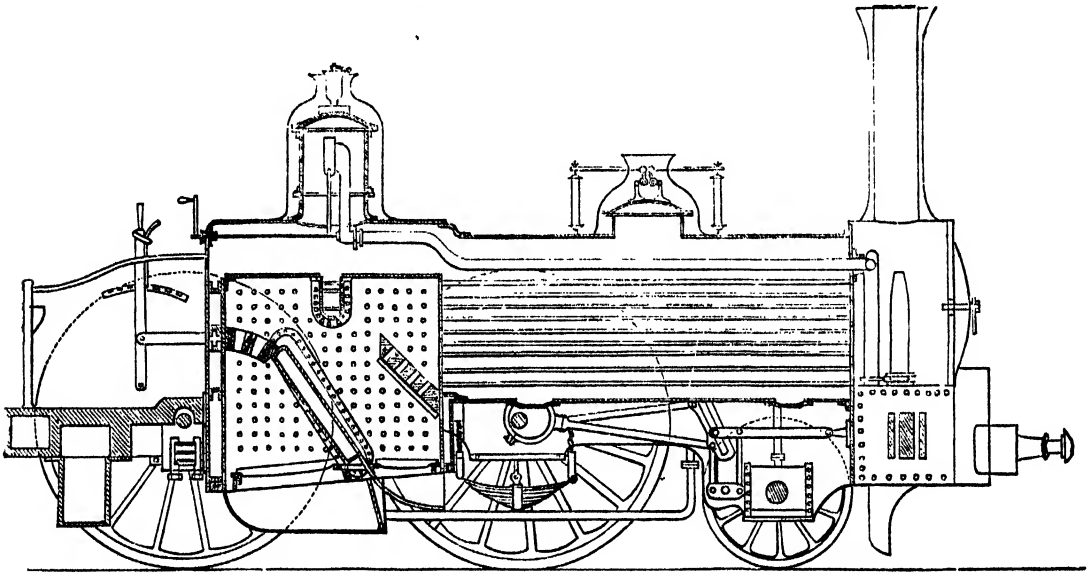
SECTION OF EXPRESS PASSENGER LOCOMOTIVE ENGINE.
